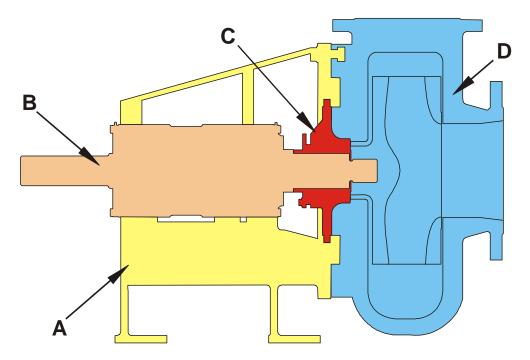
Typical outline design of Metso Minerals Slurry Pumps showing the basic pump modules: Frame (A), Bearing cylinder(B), Shaft seal(C), Wet-end (D)
